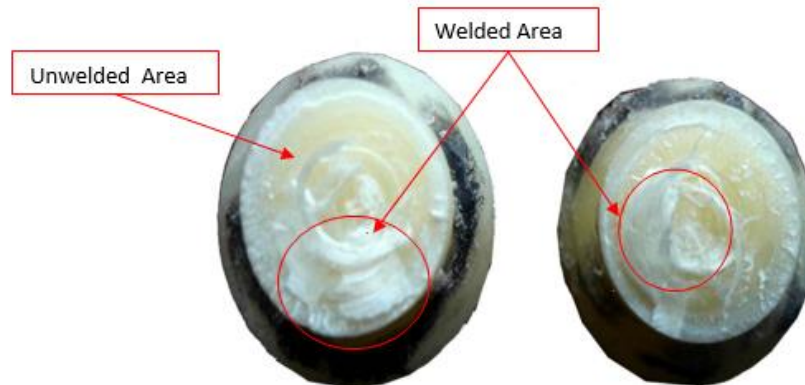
Welded ABS ter-polymer specimen at fracture
